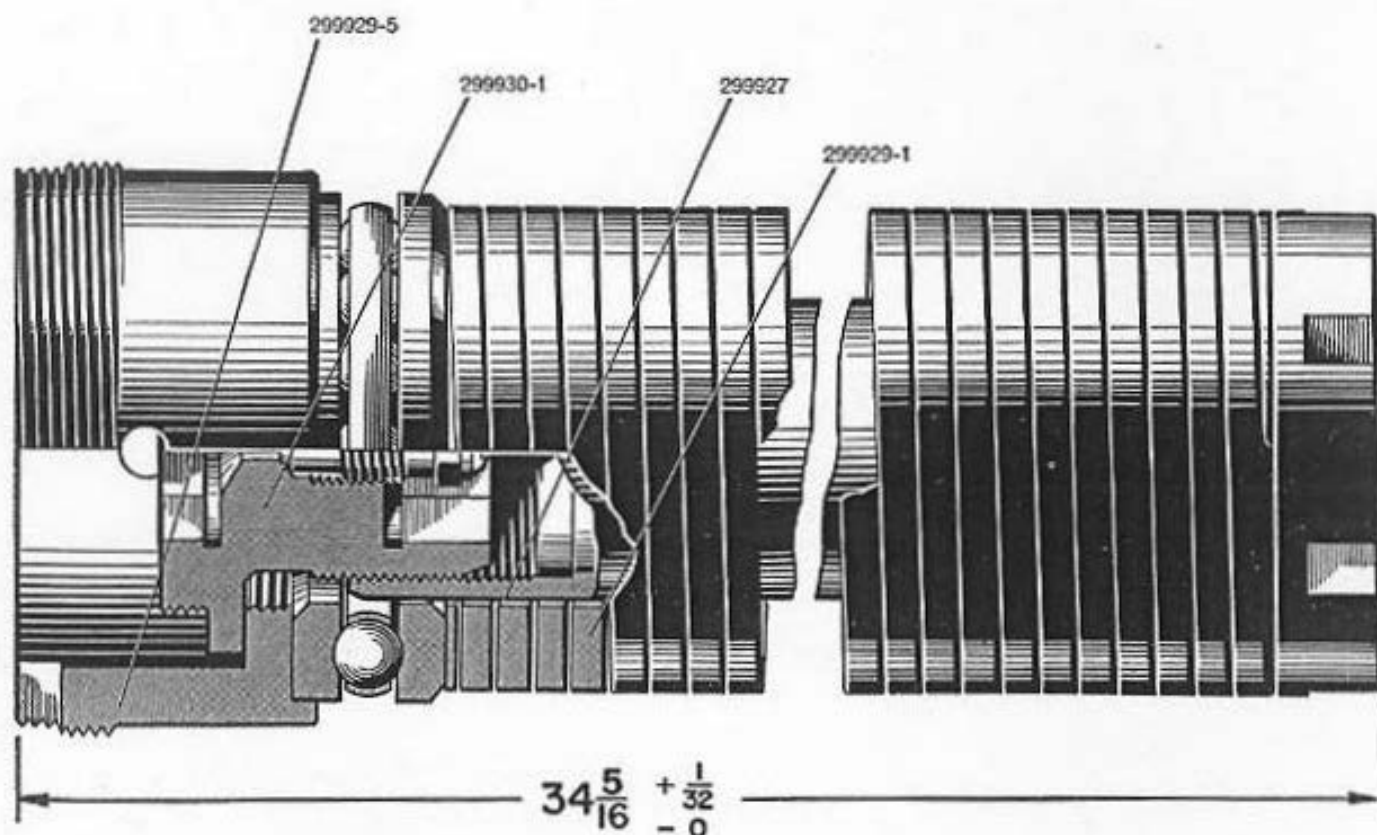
Correct length of ram spring and tube assembly (299928)—retainer plug inverted in safety position
